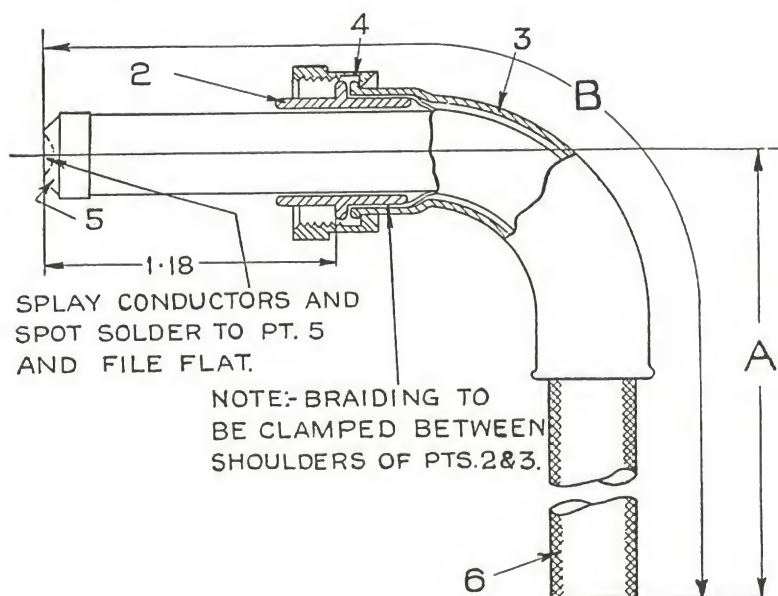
HIGH-TENSION LEAD ASSEMBLY FOR TYPE S.C.9 AND S.C.10 MAGNETOS
